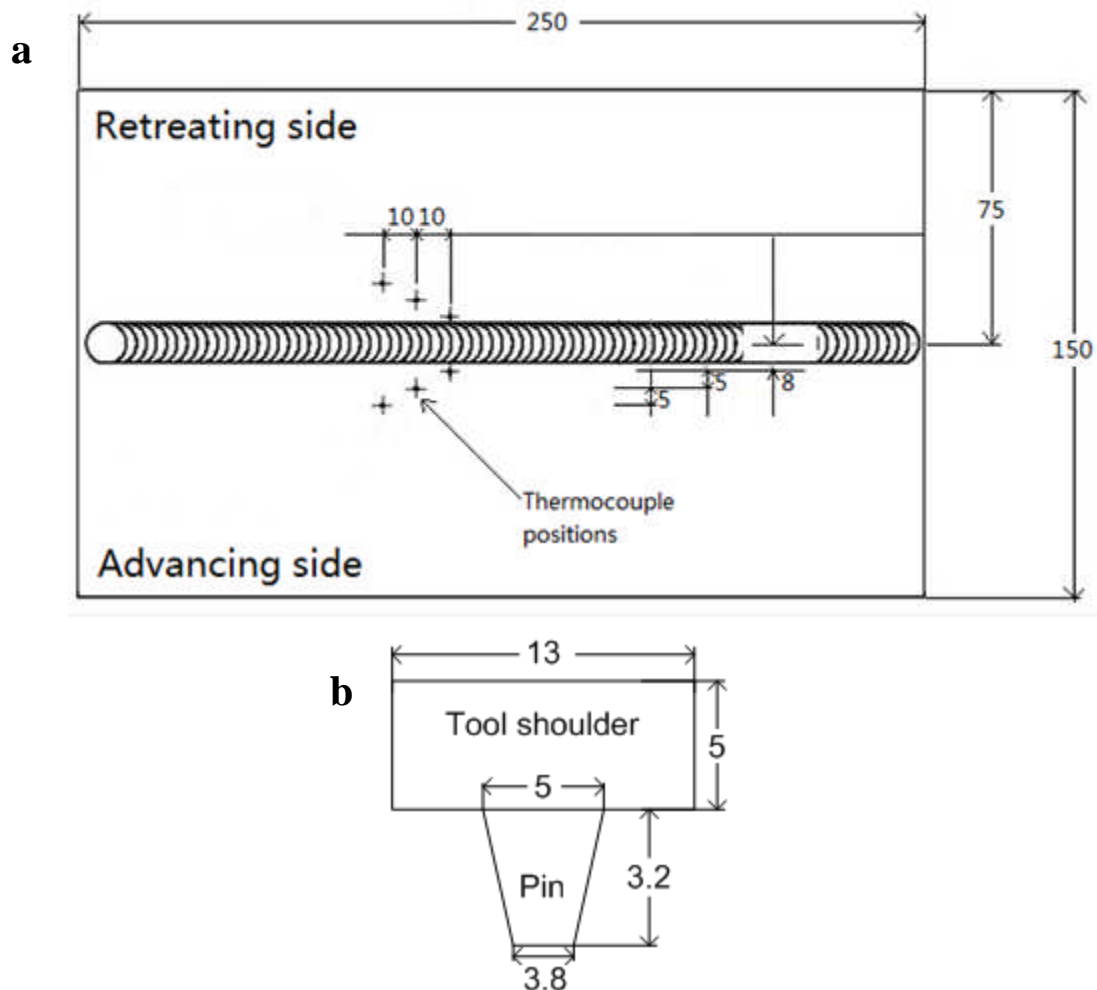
a) The welding plate and thermocouple positions and b) dimensions of the tool (units: mm)
